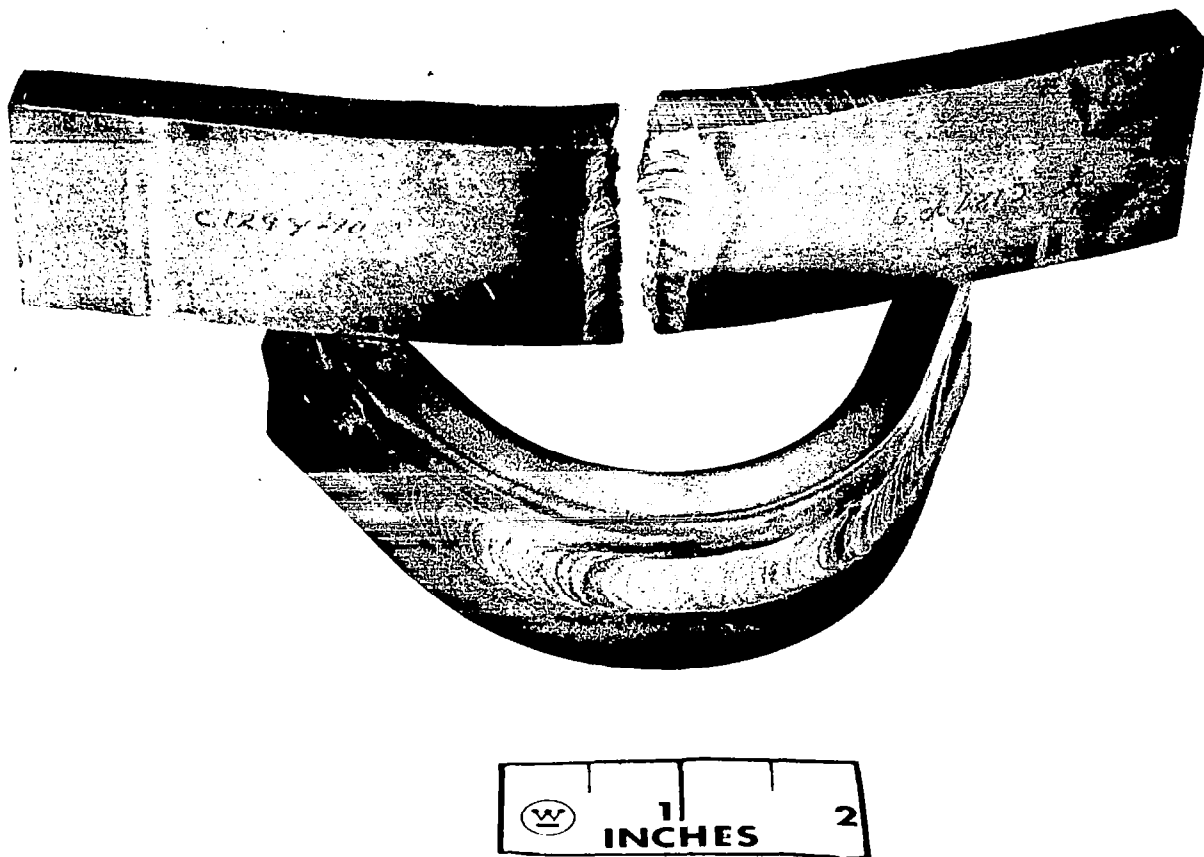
Plate Weldments Bend Tested at Room Temperature
